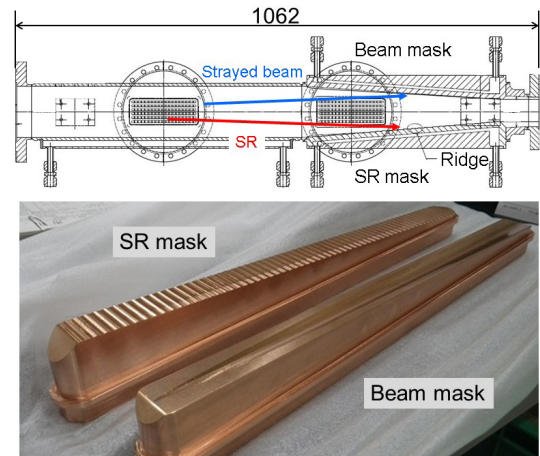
Horizontal cross-sectional view of the tapered beam pipe, and the SR and beam masks.
